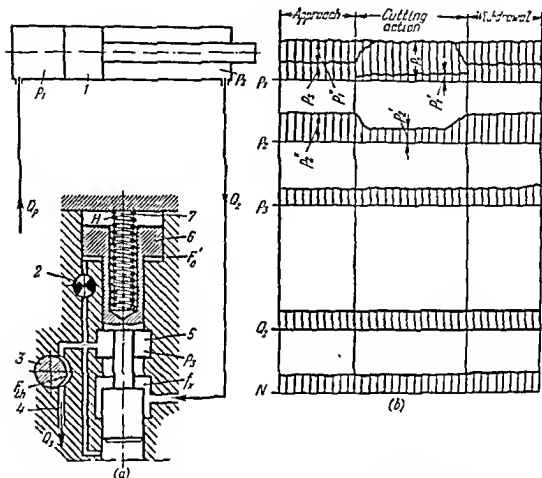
Flow control valve with pressure compensator used in metering out speed control. 1—power piston 2—damping device 3—throttle, 4—port to tank; 5—intermediate chamber, 6—mushroom-type piston of reducing valve, 7—reducing valve spring
